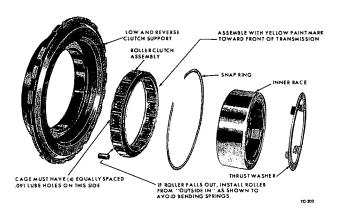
C-129 Low and Reverse Clutch Support and Overrun Roller Clutch Assembly
